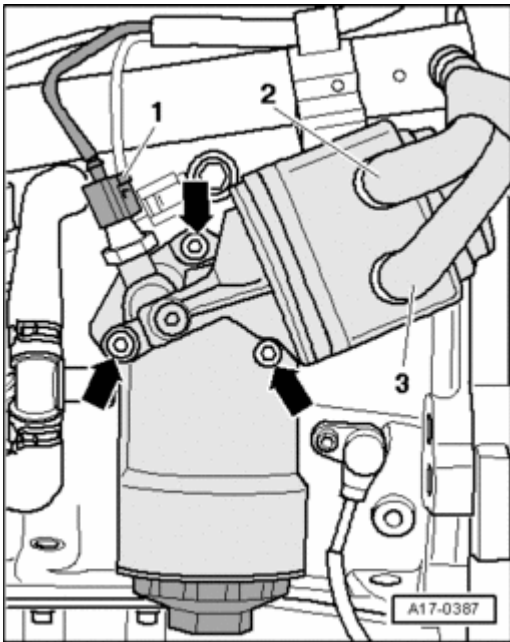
Disconnecting Electrical Connector At Oil Pressure Switch Using Assembly Tool T10118, Coolant Hoses At Oil Filter Bracket & Unscrewing Bolts And Removing Oil Filter Bracket
